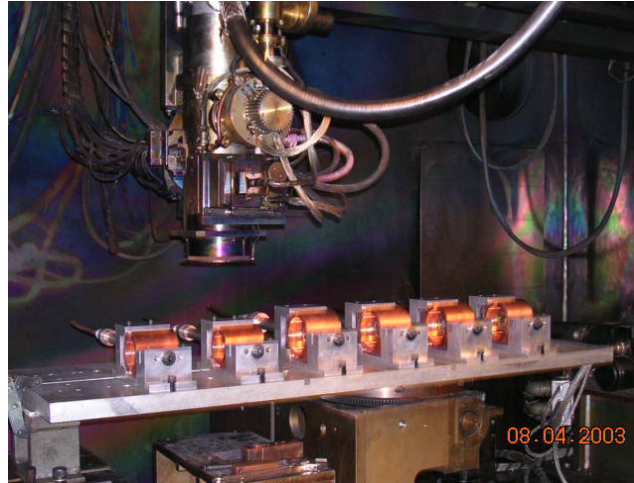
EMD Drift tubes loaded in e-beam welder.
